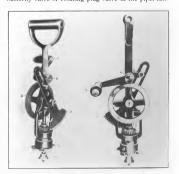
The Automatic Unive Grinder Imparting Reciprocal Movement to Valve as Well as Lifting Latter from its Scal.
